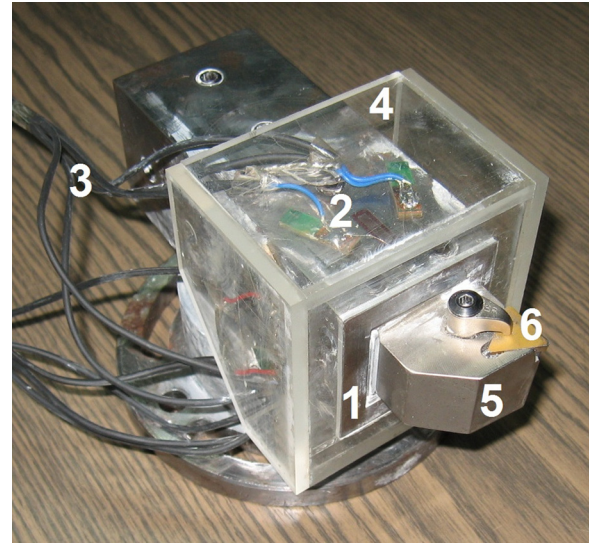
Cabled dynamometer with identified strain gauge that its strain gauge safeguard, tool holder, and tool are attached (in the figure: 1- dynamometer, 2- strain gauge, 3- cable, 4- container, 5- tool holder, and 6- tool)
